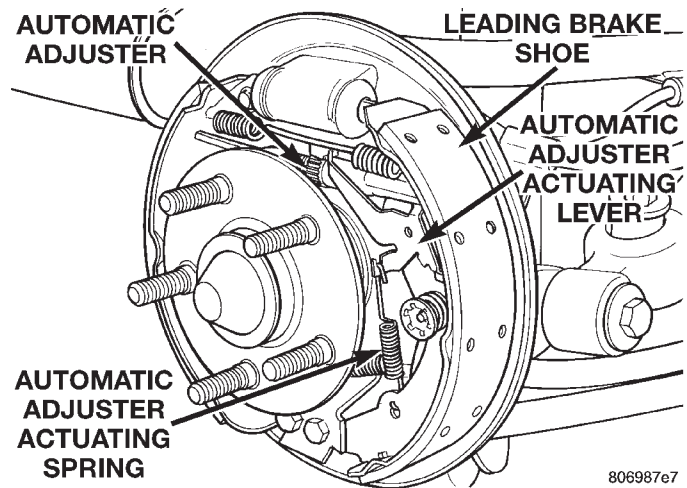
Automatic Adjuster Actuating Spring And Lever
